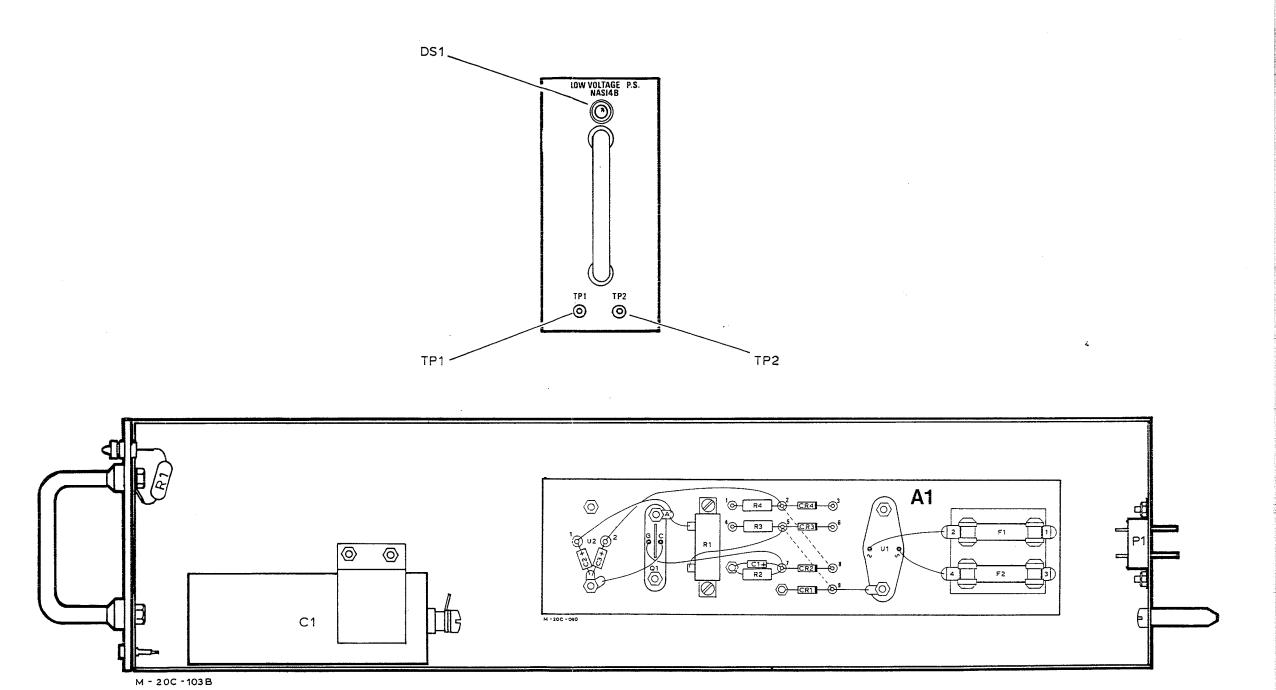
Assembly Detail - NAS14B Low Voltage Power Supply Module
